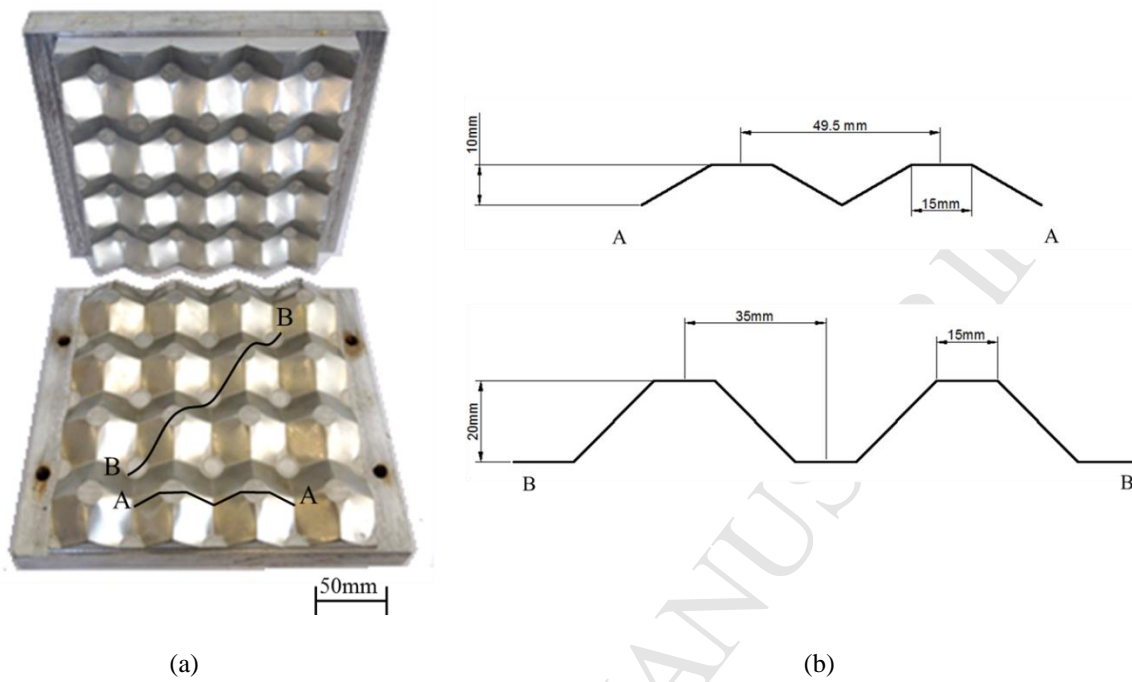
Photographs of the mould and profile of the mould showing the egg-box design.
